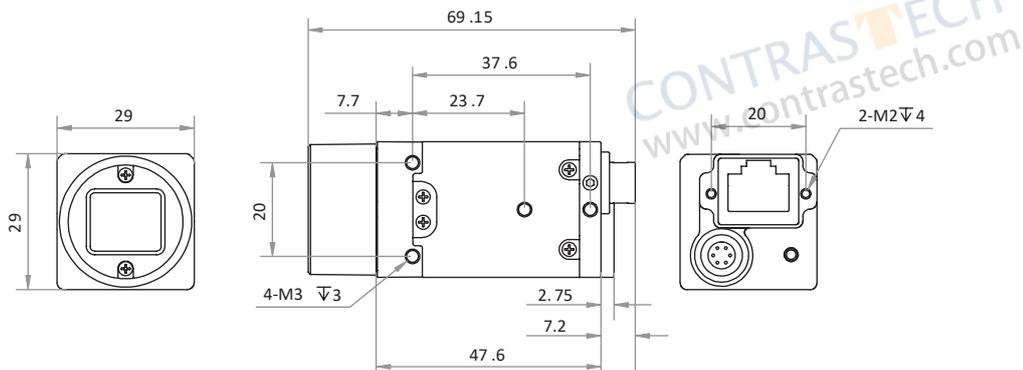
Mechanical Dimensions of the C-mount GigE Cameras with 29\*29\*42mm housing (The installation uses M3 screws).
